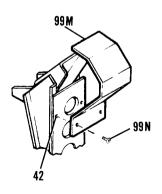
A. Lower Forward Fuselage Structure Assembly (Sheet 2)
